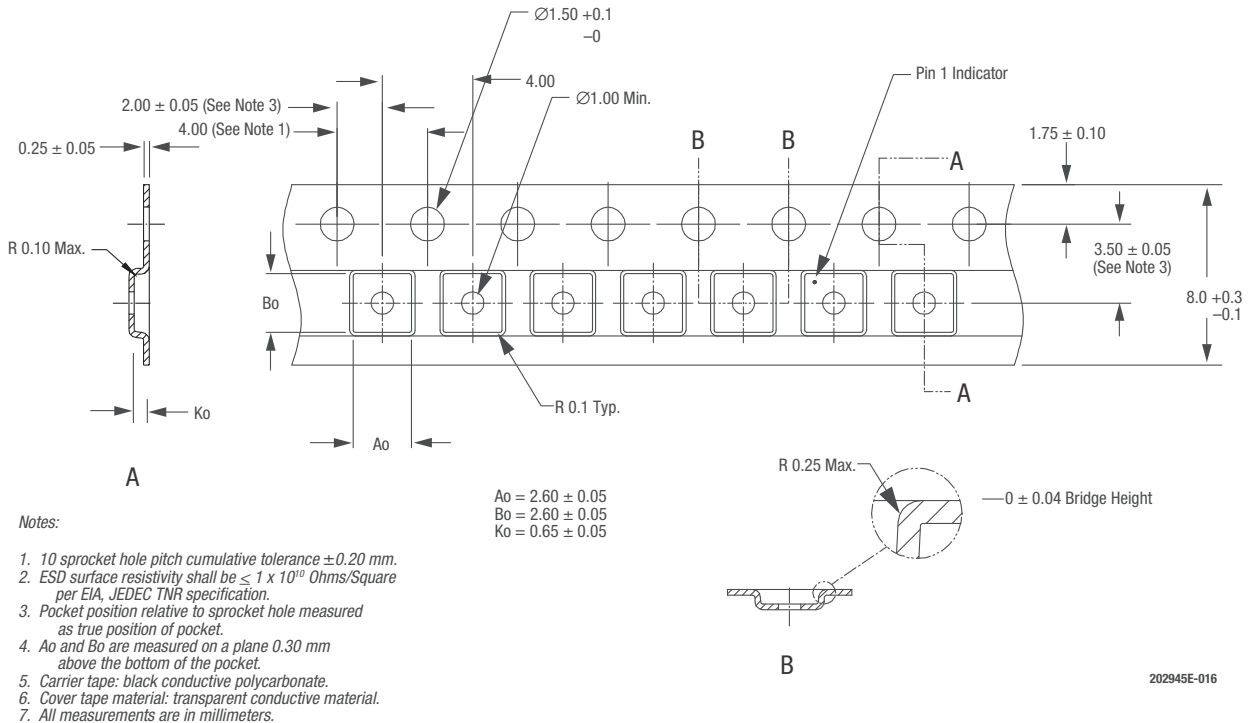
SKY16602-632LF Tape and Reel Dimensions
